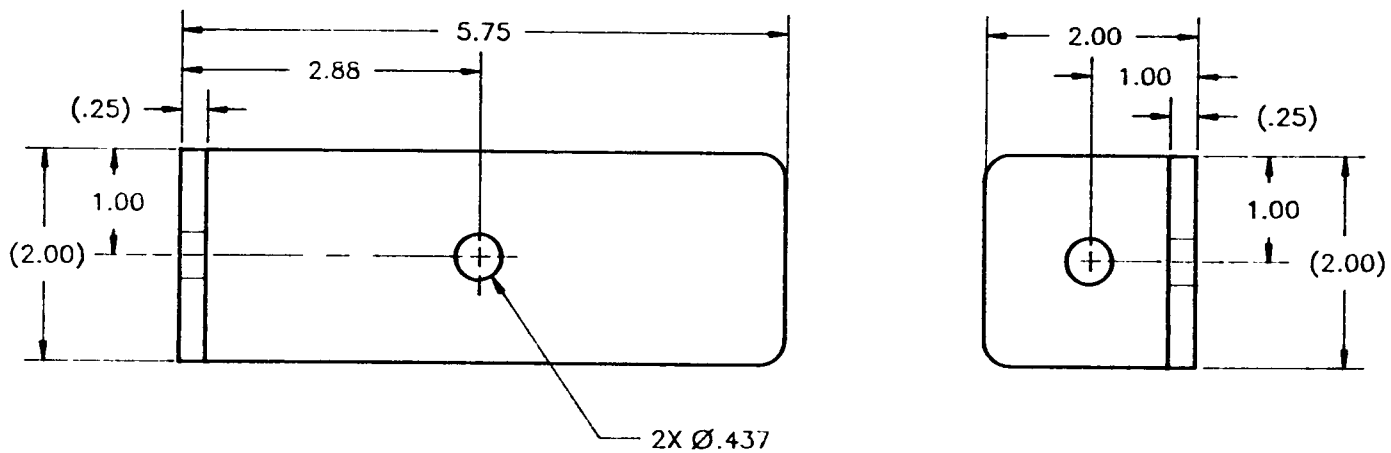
Welding Table Bracket. Part Number 20089716
